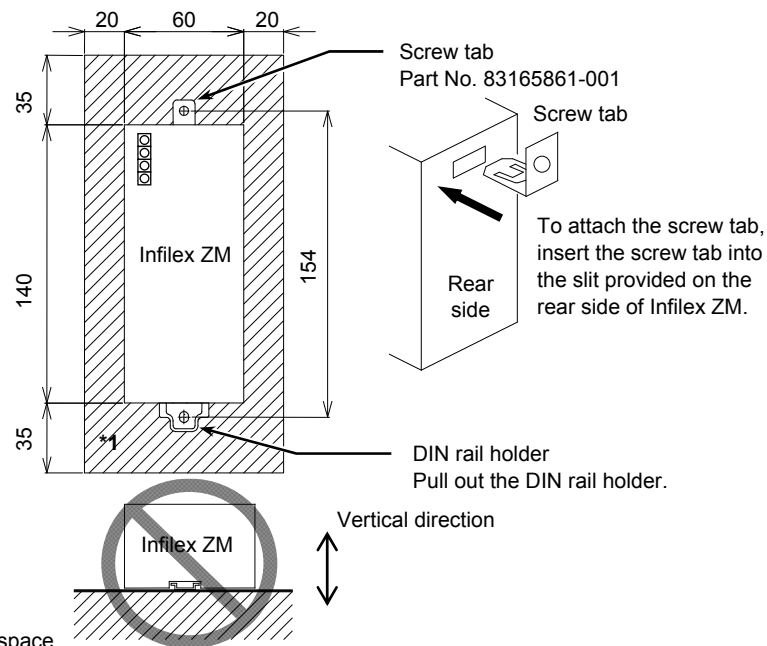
Mounting dimensions: DIN rail mounting (mm)
